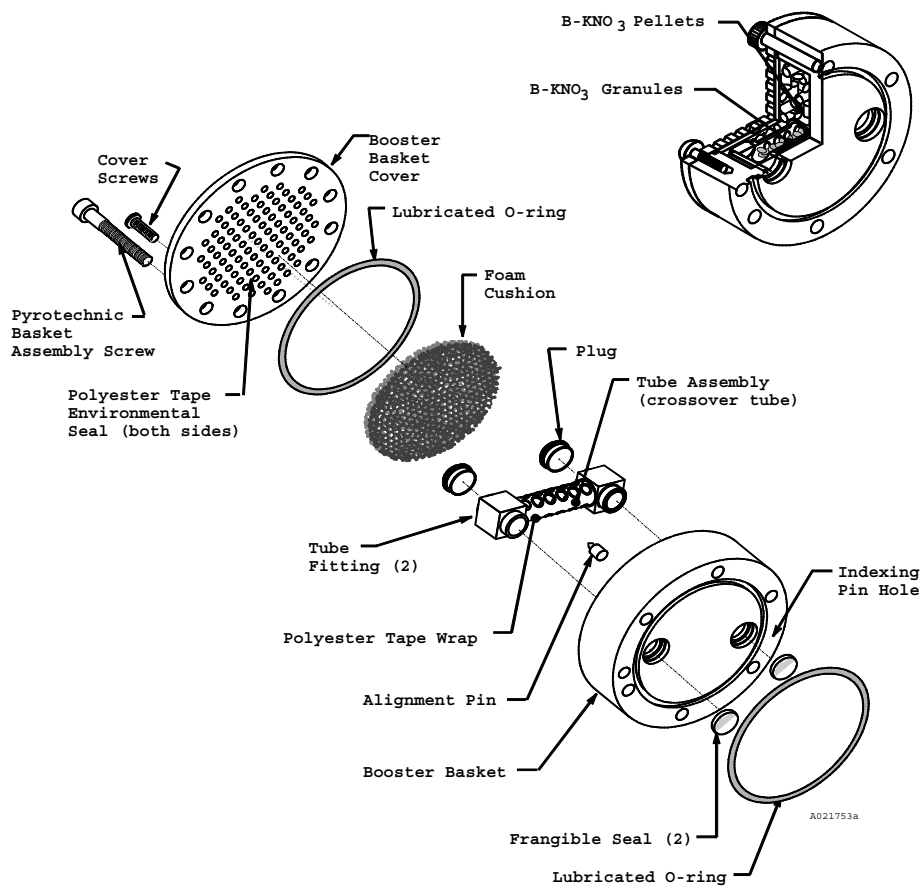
Pyrotechnic-Basket Assembly Section and Exploded Views
